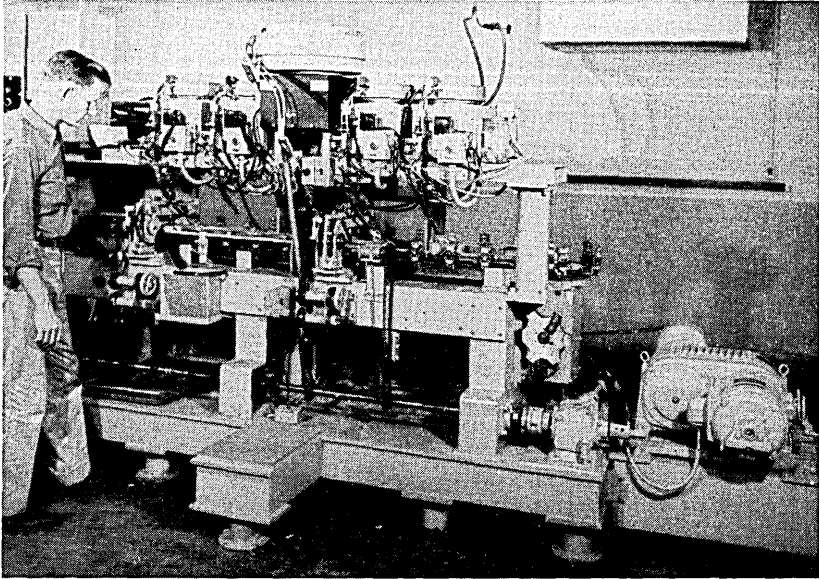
Machine for assembling and soldering capacitors to the wafers—the two small vibratory feeders on either side of the large feeder deliver capacitors positioned for soldering; the center hopper feeds the circuit wafer into position and the assembly is induction soldered
